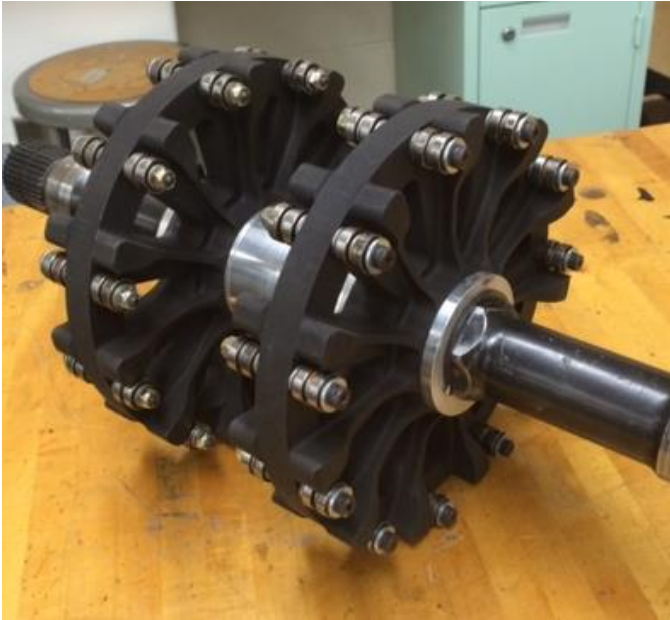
The new carbon fiber drive sprocket with integrated roller bearings.
